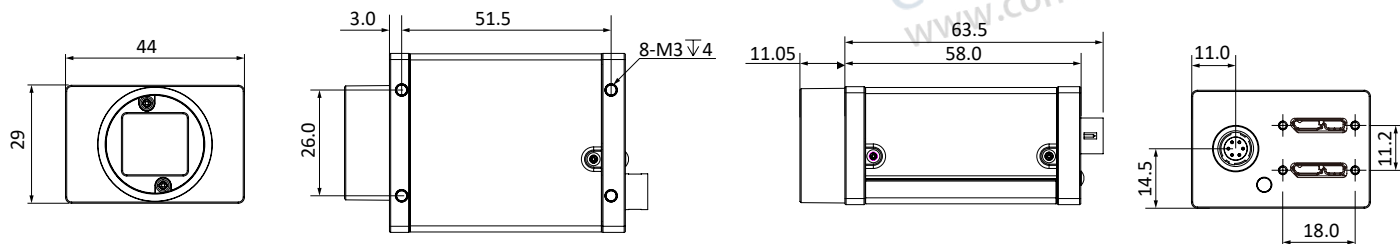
Mechanical Dimensions (in mm) for Dual USB3.0 Cameras with 29 \* 44 \* 58mm flat housing.
